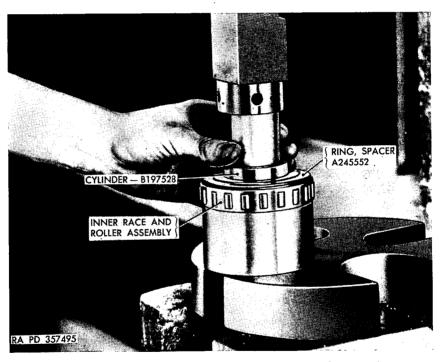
Removing hydraulic motor roller bearing and spacer ring.
